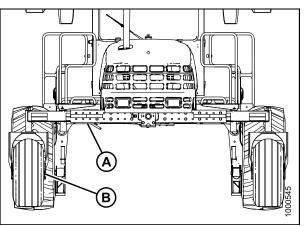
Caster Wheel Assembly and Walking Beam (Engine-Forward View)
